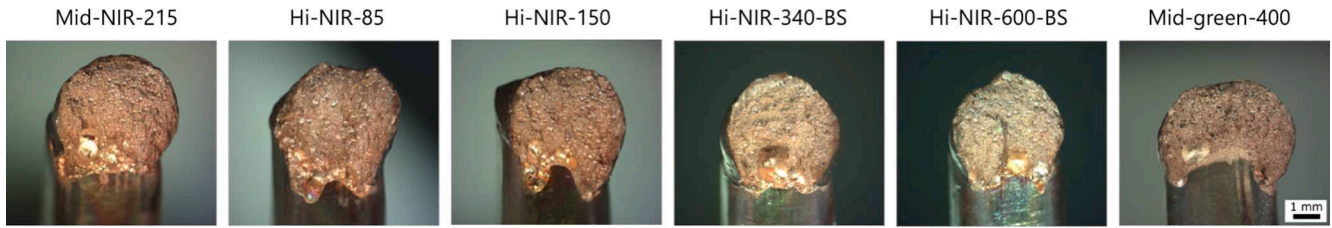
Representative images fracture surfaces of the weld beads produced with the different laser systems.
